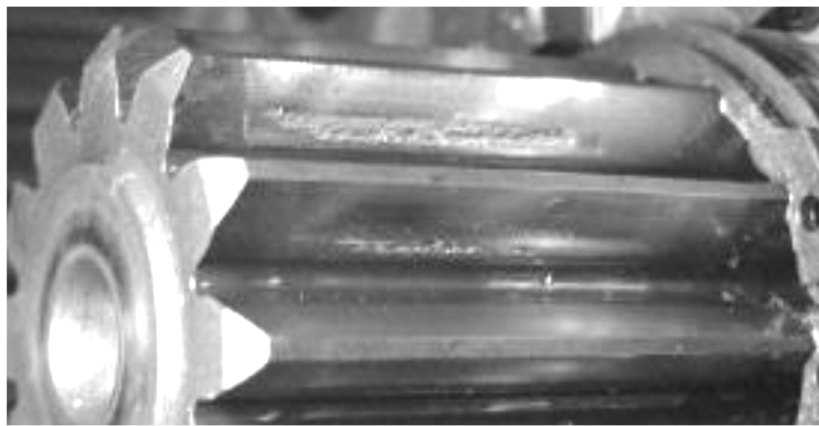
GSC macropitting on the sun gear of a planetary gear set in an off-highway axle.
